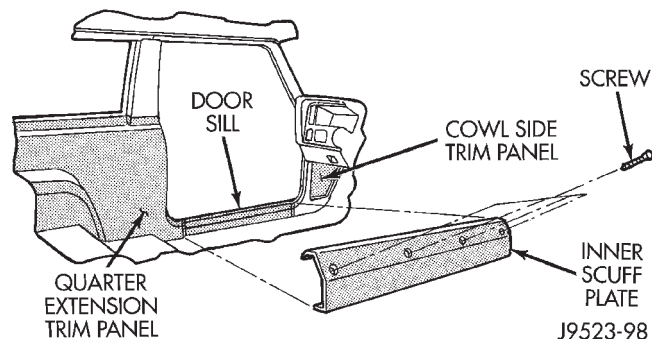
Front Inner Scuff Plate—2-Door Vehicles
